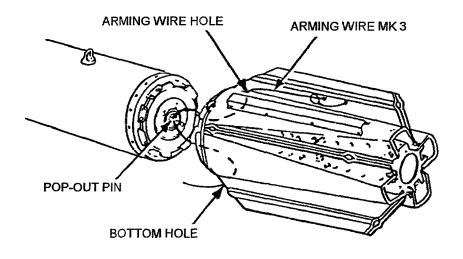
B. Arming Wire and Fin MAU-91A/B Removal
